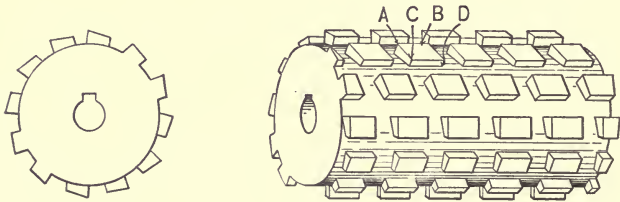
SPIRALLY-GROOVED MILLING-CUTTERS.
